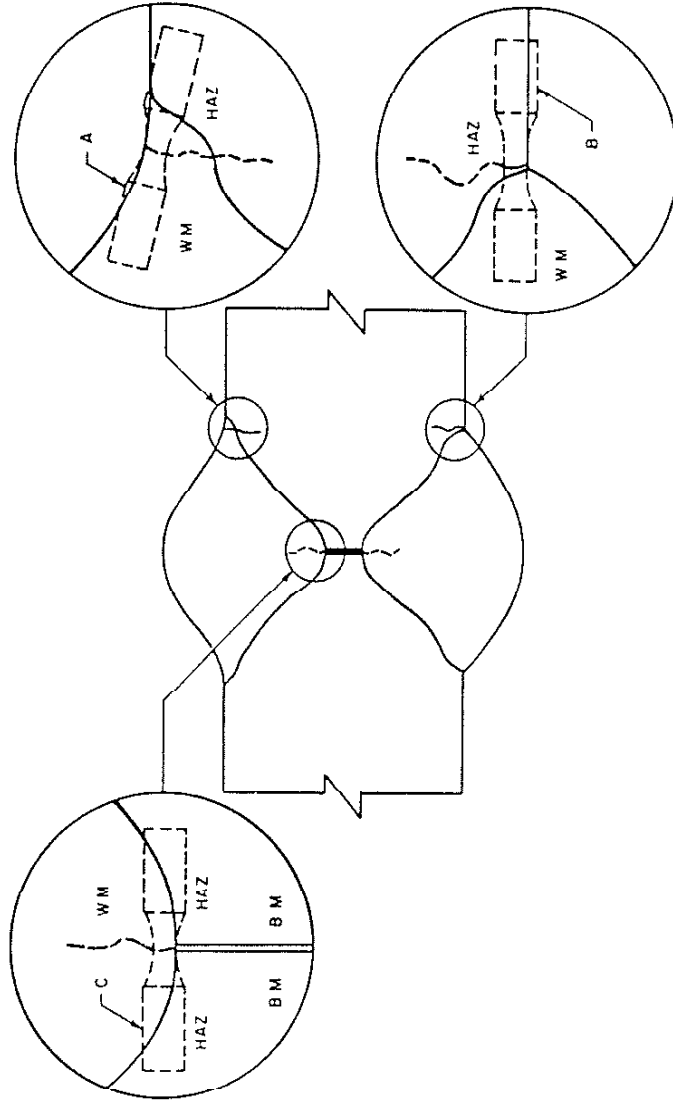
Typical locations of fatigue crack initiation in a butt weld. Fatigue cracks can initiate: in diluted, untempered weld metal (A); in the heat-affected-zone close to the line of fusion (B); and in tempered weld metal (C). The dashed-in fatigue specimens are laboratory smooth specimens which, if subjected to the local strains, should initiate a fatigue crack at the same life as the region in question. From Higashida [2].
